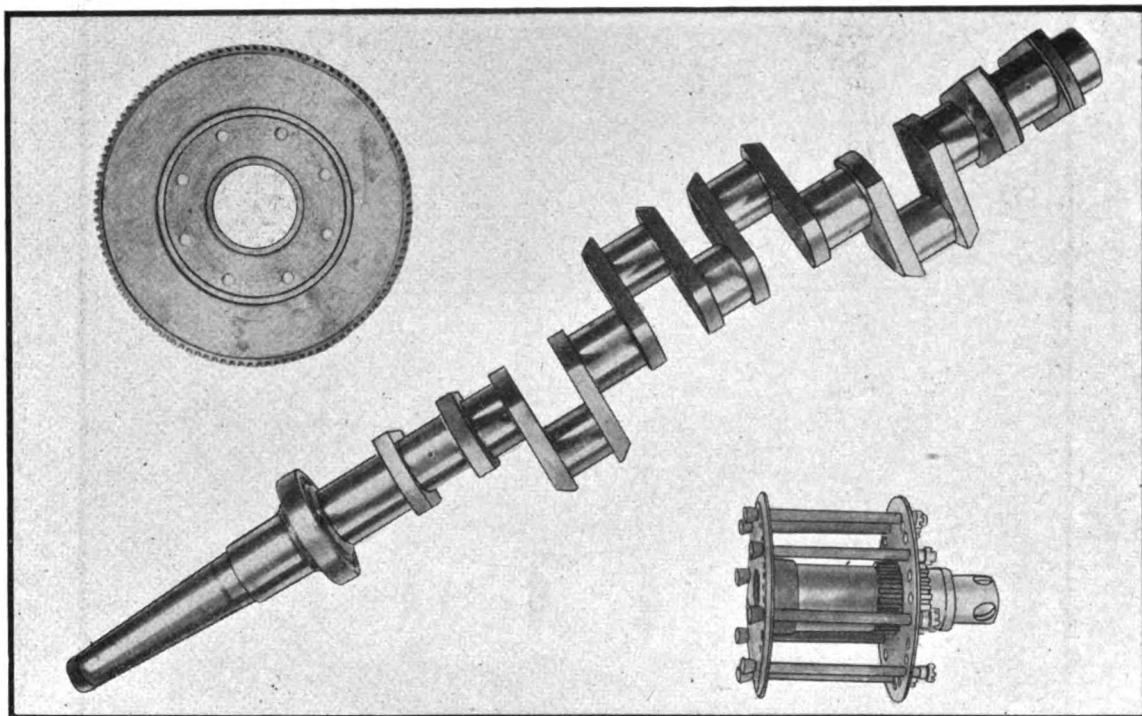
Crankshaft, propeller hub, and starting gear.
